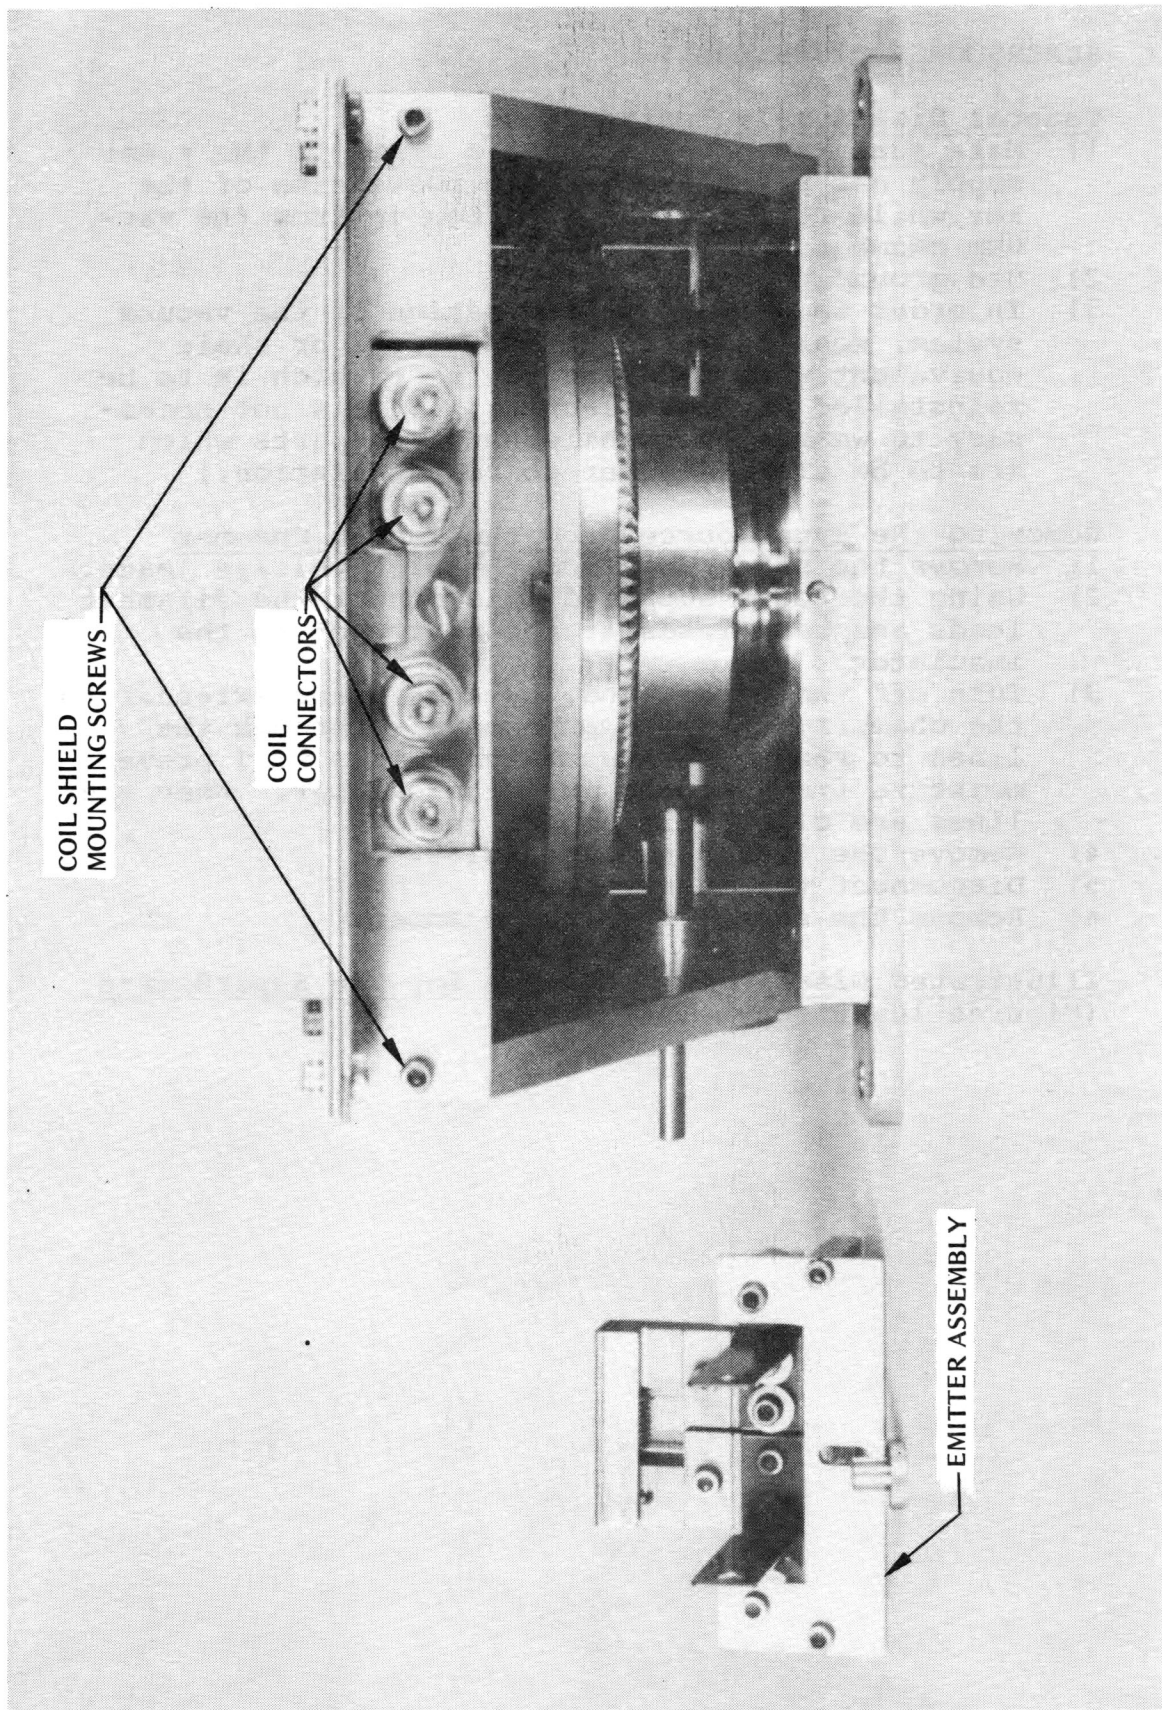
Remove the emitter assembly as shown in figures 9a and 9b. Then, unscrew the two coil shield mounting screws and remove the coil shield. When removing the second screw, hold the shield so it doesn't fall and damage the ceramic coil connectors.
